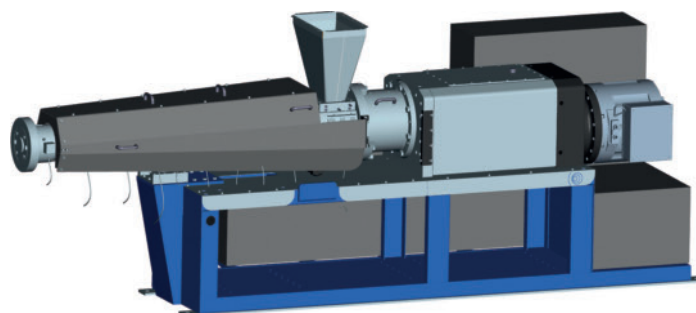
Co-rotating twin-screw extruder with fitted torque drive (photo: M-A-S)
